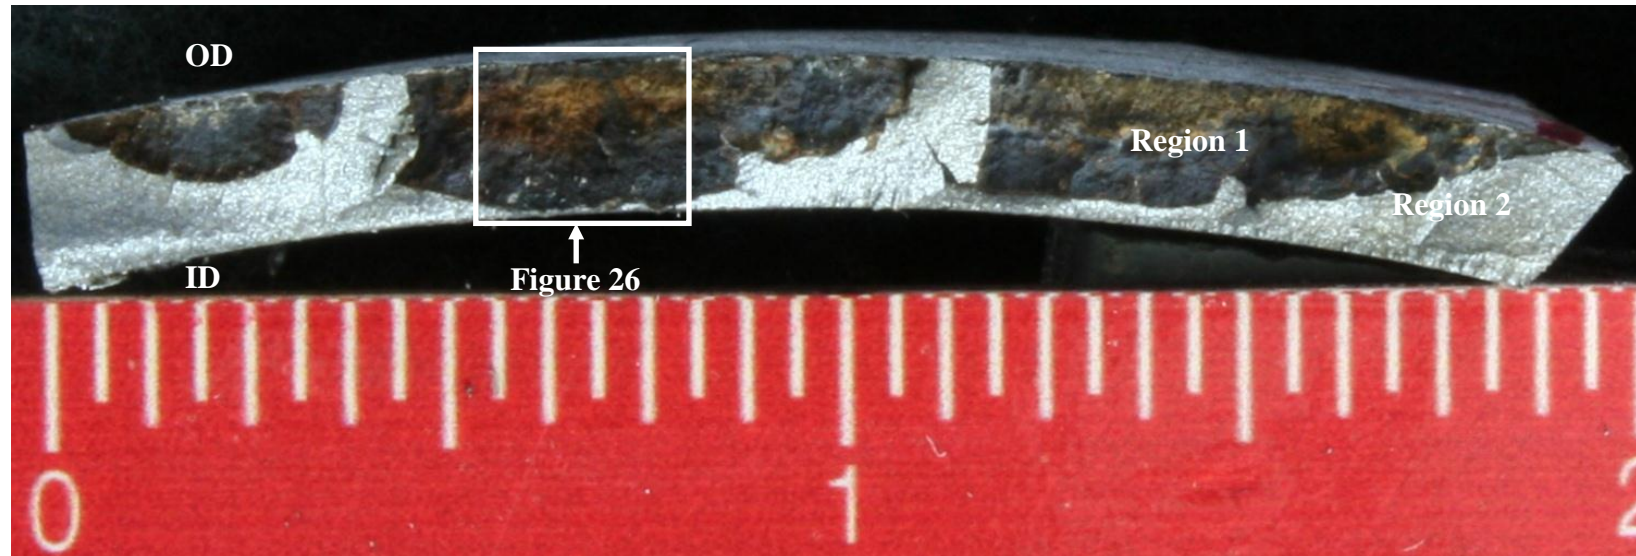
Photograph of the fracture surface removed from Crack Colony 2.
